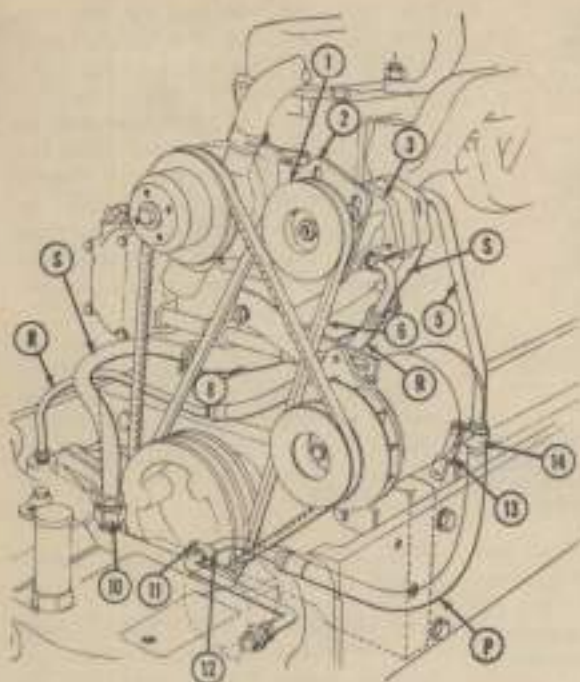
Drawing showing location of power steering pump and tubes on D-17 non-diesel models, tractor Serial No. D17-42001 and up. Control valve to ram tubes are not shown.
